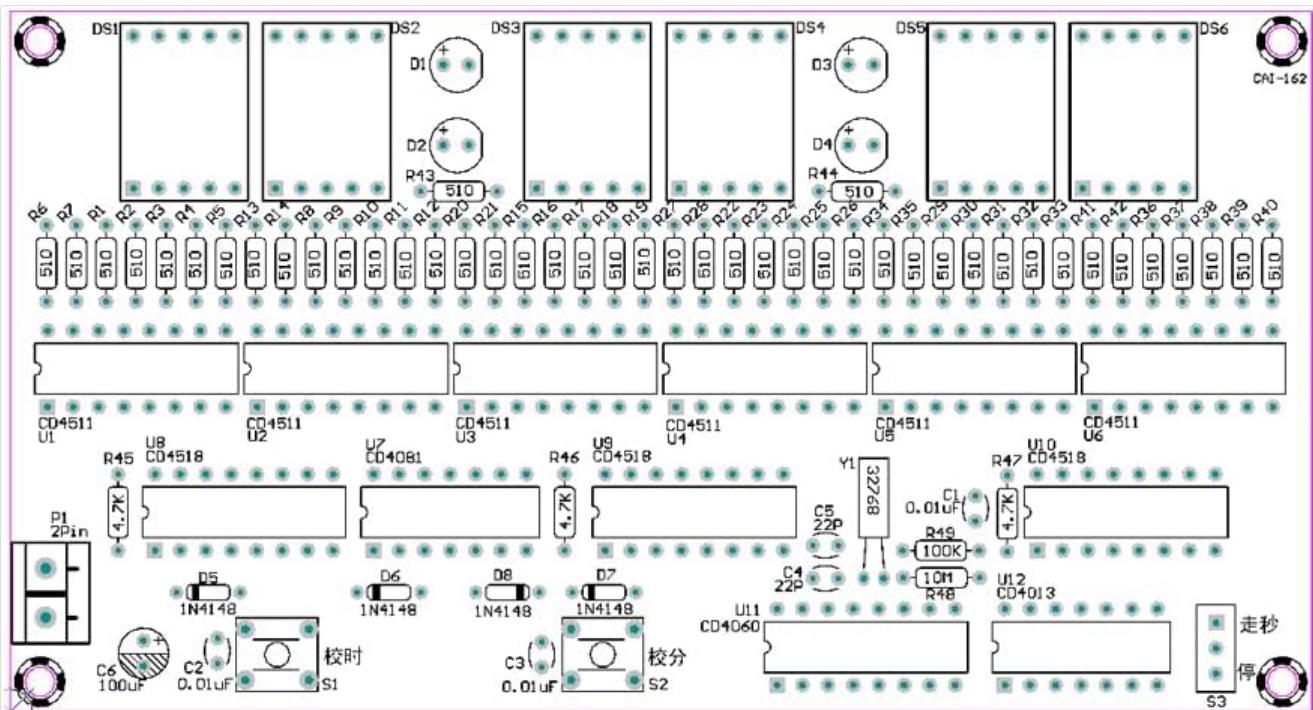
Top view of the circuit board, showing component placement and overall dimensions (130mm x 70mm).
